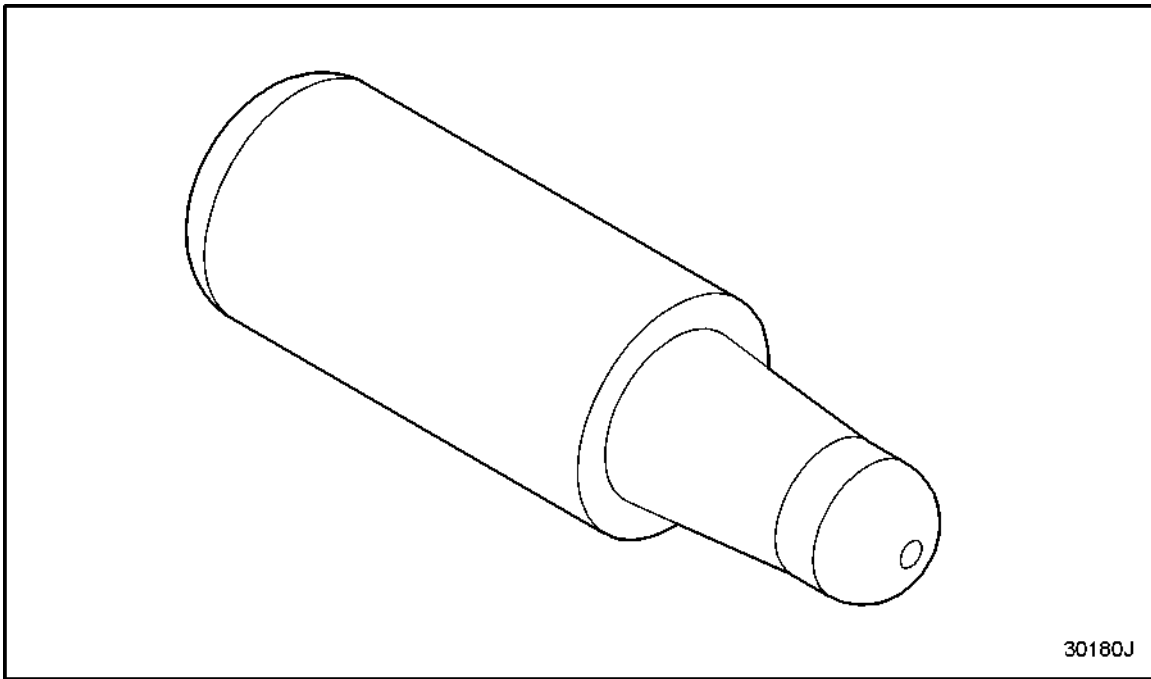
Injector Tube Swagging Tool J 28611-A
